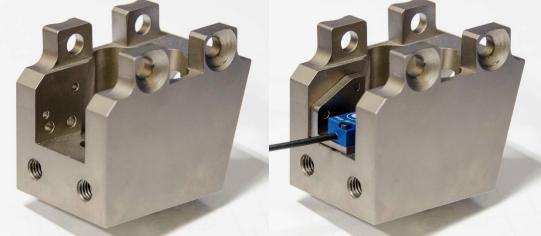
Installing pelvis tilt mount assemblies (lumbar mounting block uninstalled for illustrative purposes)
